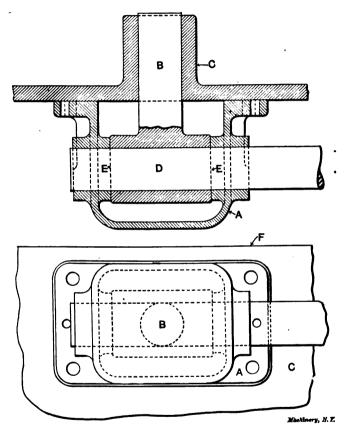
T-jig for Locating a Bevel Gear Bracket
